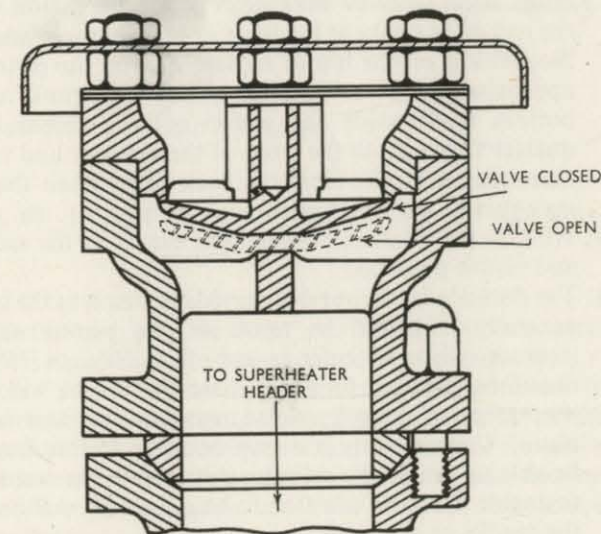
ANTI-VACUUM VALVE MOUNTED ON SUPERHEATER HEADER
